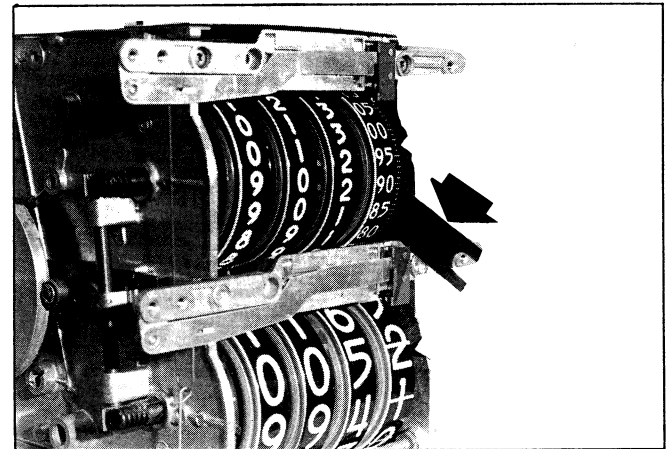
0.015 inch (0.38 mm) feeler gauge in right side of wheel bank.
